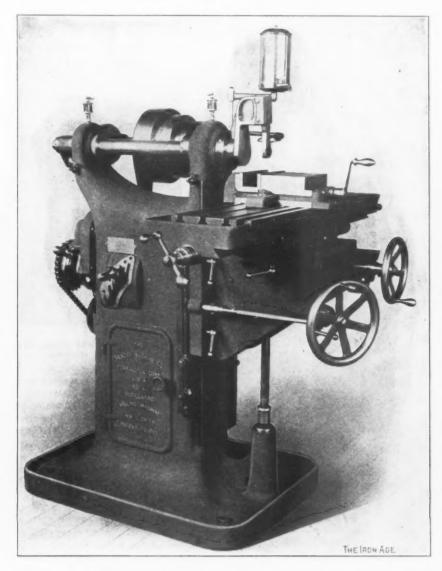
The No. 4 Oscillating Milling Machine, Made by the Hendey Machine Company, Torrington, Conn.
